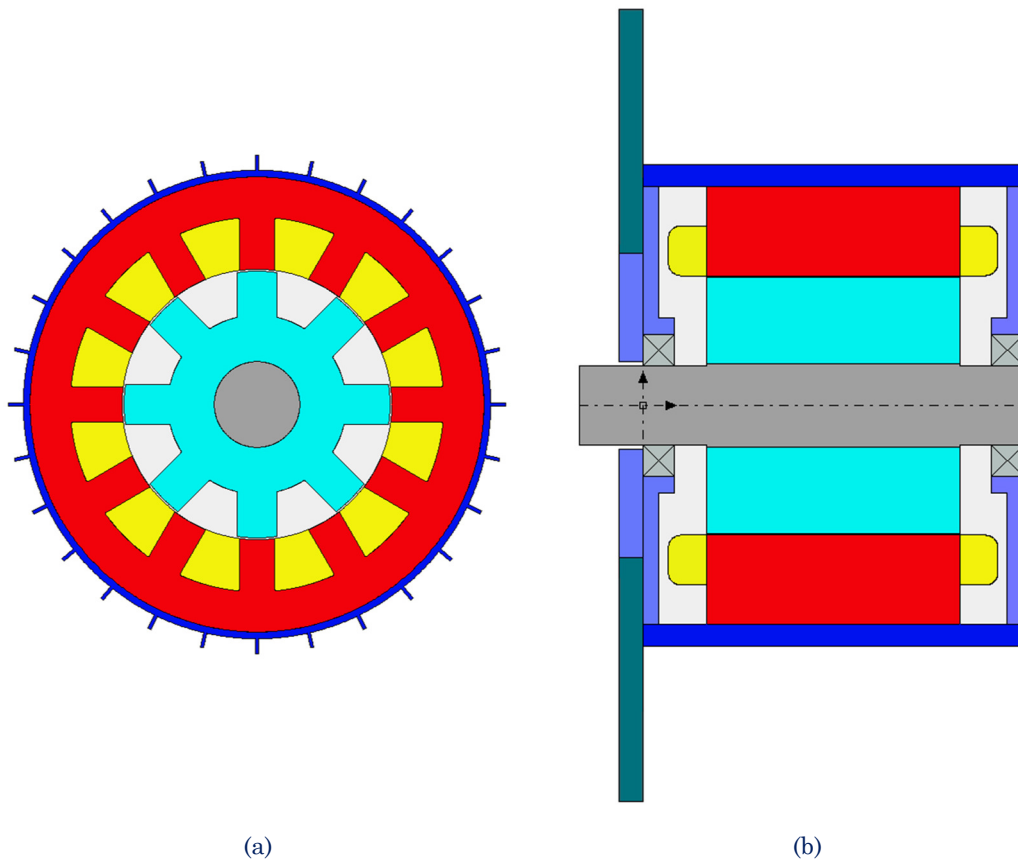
SRMyld MotorCad model: (a) front view, (b) side view.
